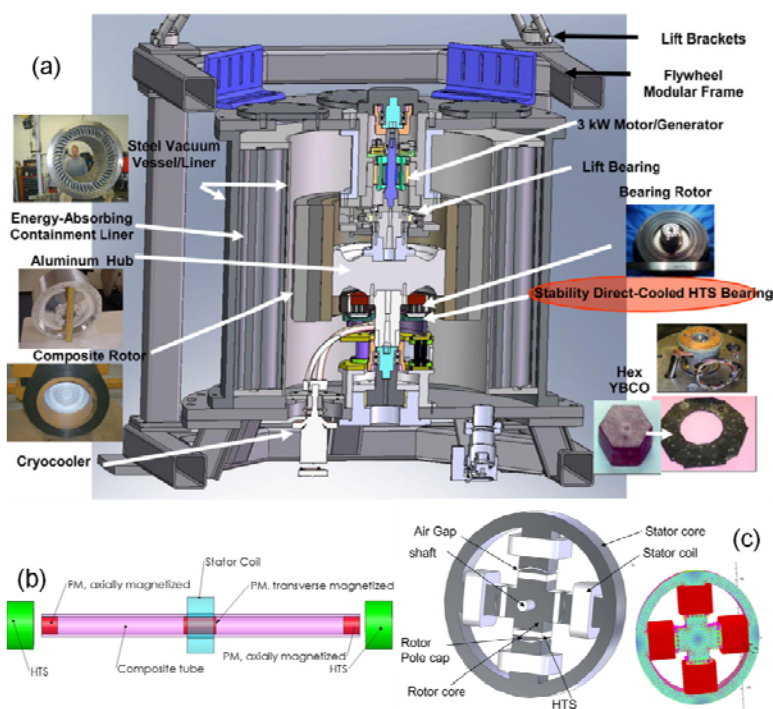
(a) Overall design of the Boeing flywheel energy storage [69]. (b) Schematic of rotor components, HTS stators, and motor stator coils [70]. (c) The basic configuration of Boeing TF-HTS motor/generator [71].
